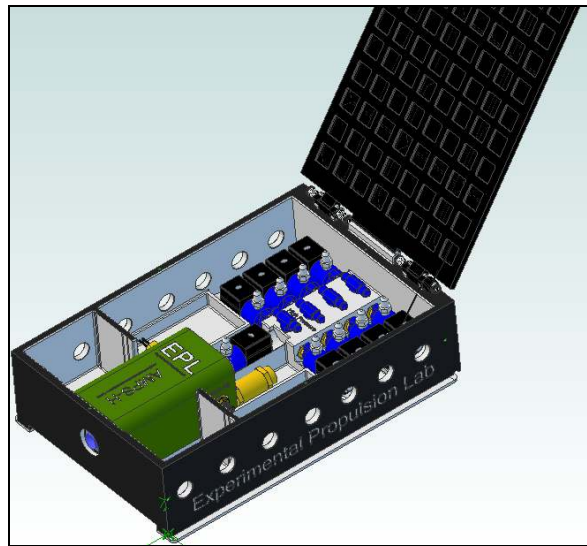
6U Engineering Design Unit With Solar panel and cold gas RCS
